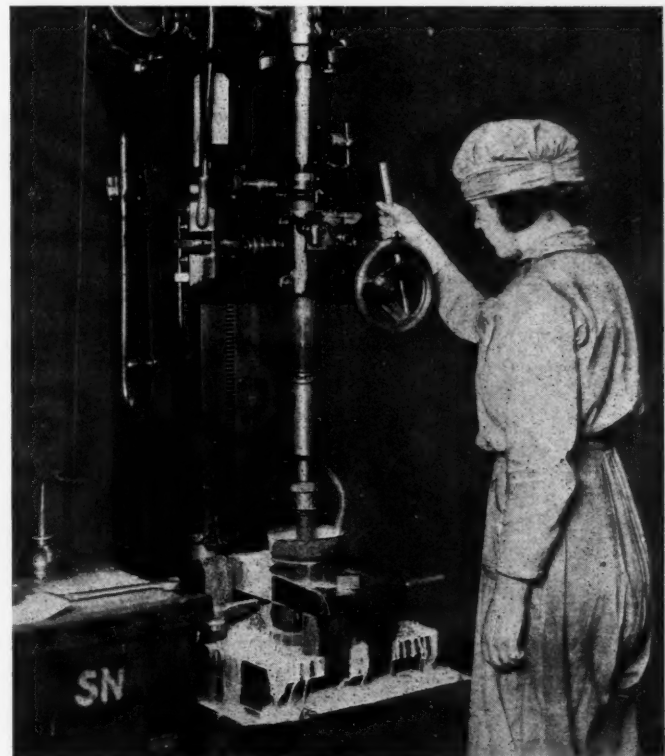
Boring or butt-milling radius back of bolt bosses on Cincinnati-Bickford drill press
